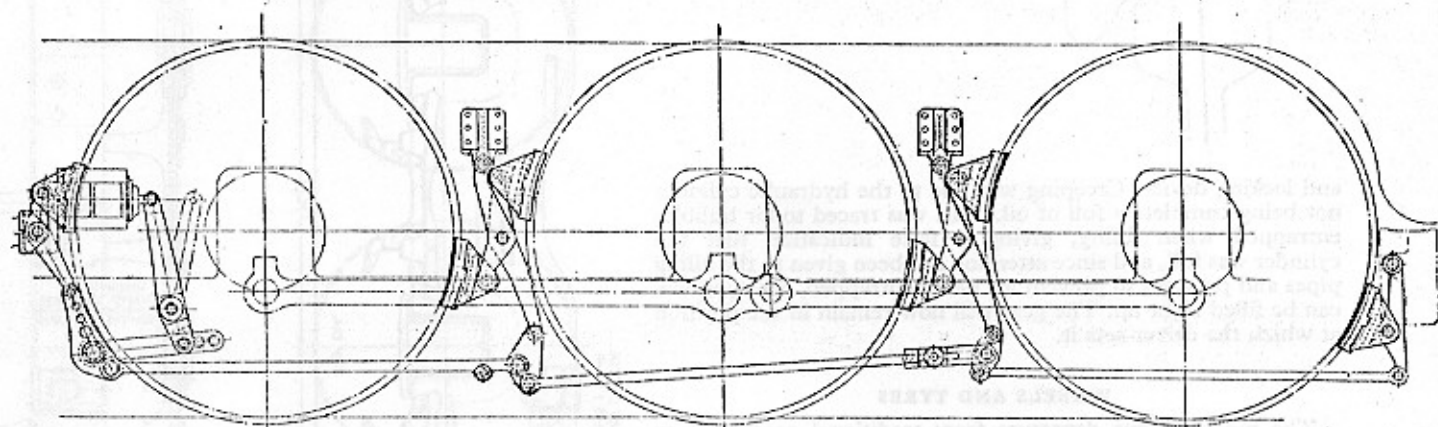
Brake Gear showing Hangers and Clasp Brake
